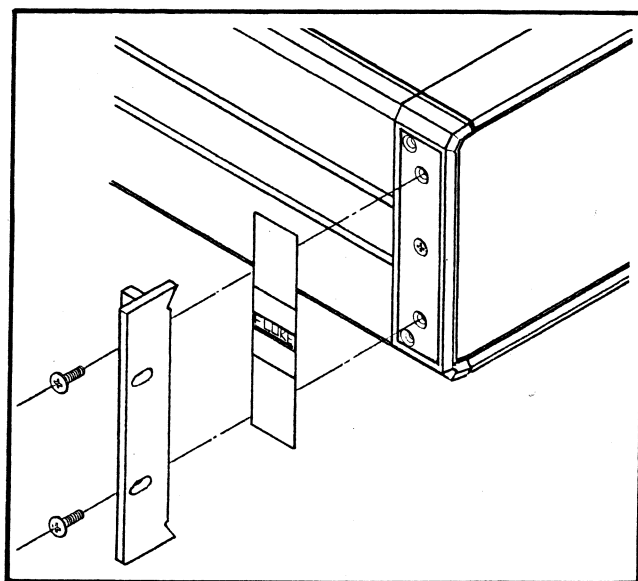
INSTALLATION OF RACK MOUNTING EARS
